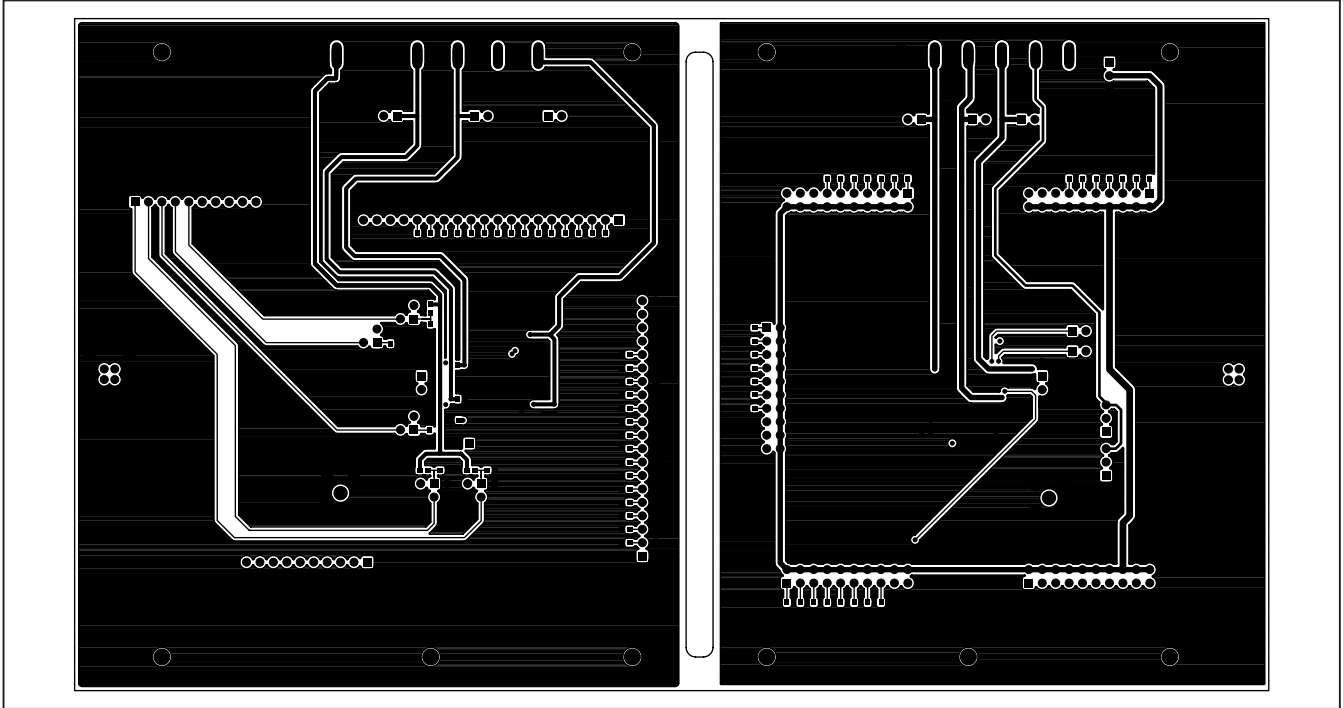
MAX9217/MAX9218 EV Kit PCB Layout—Solder Side
